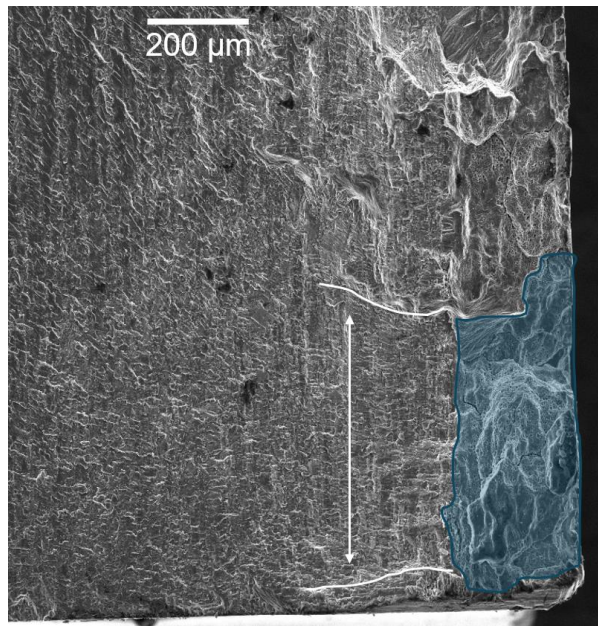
Exact defect area for severely corroded specimen demonstrating the selection of defect area based on connected corrosion damage contributing to the same crack initiation. The specimen shown is the as-extruded specimen with 24 h of pre-corrosion and a fatigue life of 68 449 cycles.
